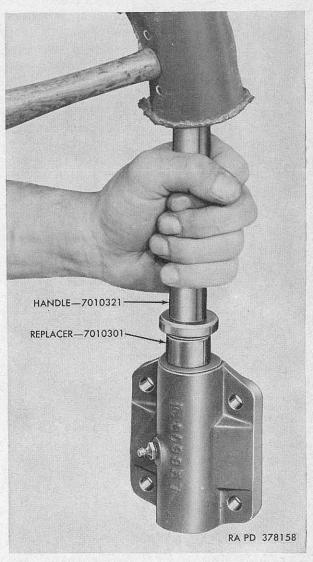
Installing rear steering bellcrank bearing with replacer 7010301.
